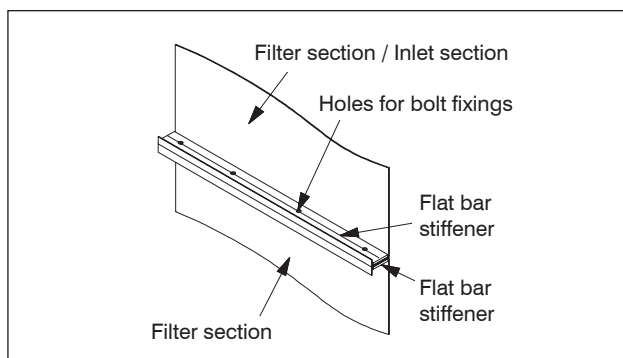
Part view showing typical fixing position of flat bar stiffeners on site joint
